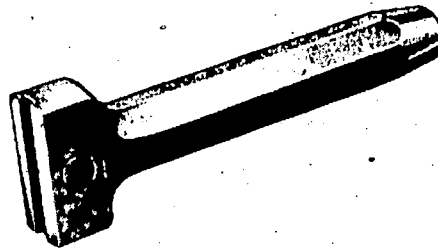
Hand punch. (Courtesy Whitney Metal Tool Company)
